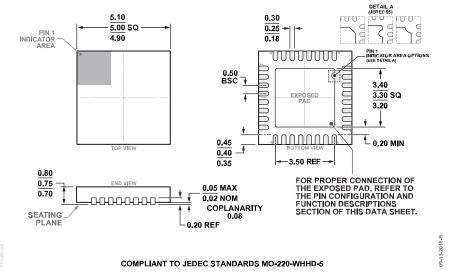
32-Lead Lead Frame Chip-Scale Package [LFCSP]
